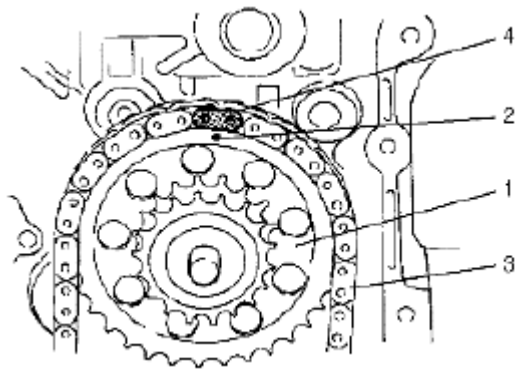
Aligning Dark Blue Plate Of 1st Timing Chain & Match Mark On Idler Sprocket
